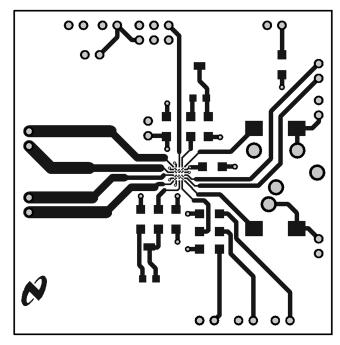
Recommended DSBGA PCB Layout: Top Layer
